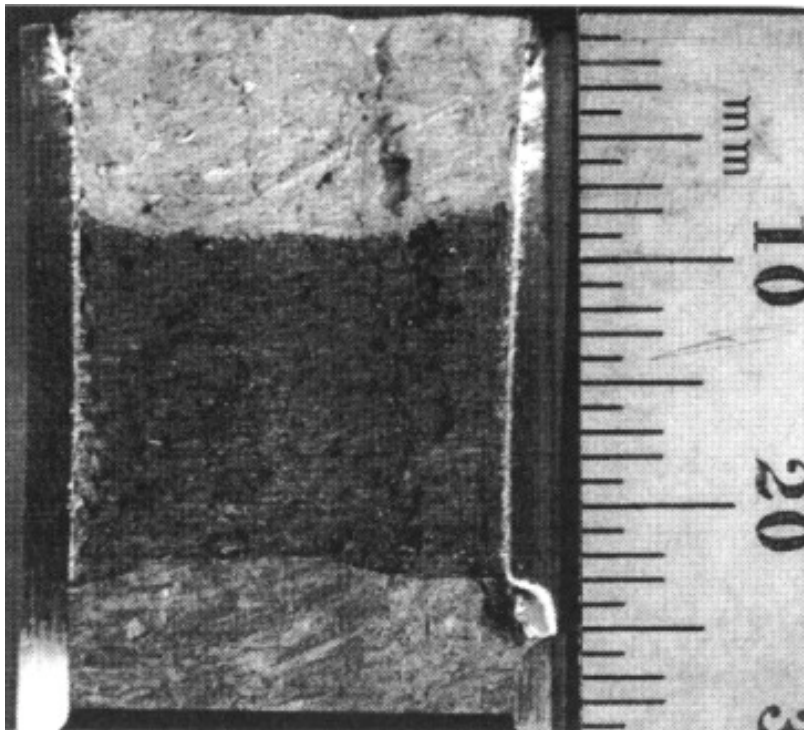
Fracture surface of aged weld metal PWWO tested at 290°C
